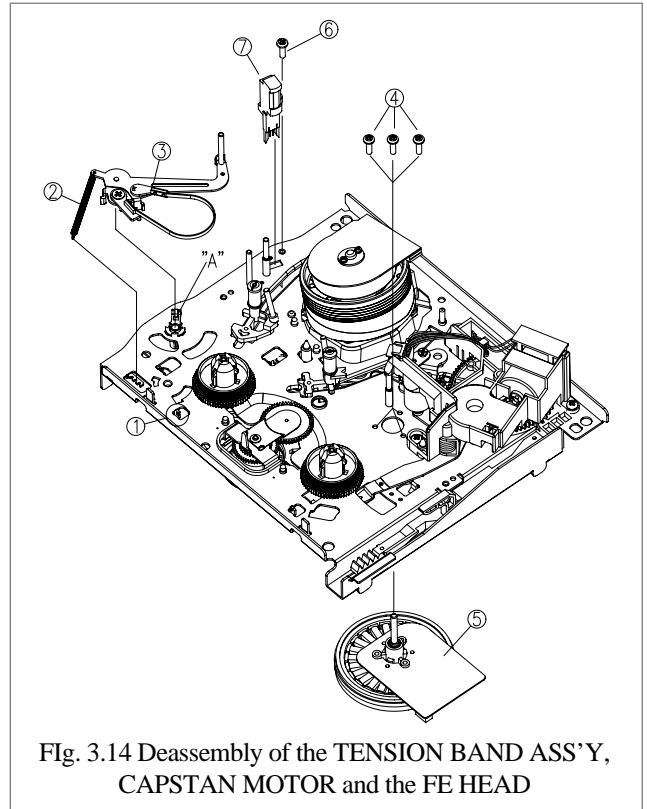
Deassembly of the TENSION BAND ASS'Y, CAPSTAN MOTOR and the FE HEAD
